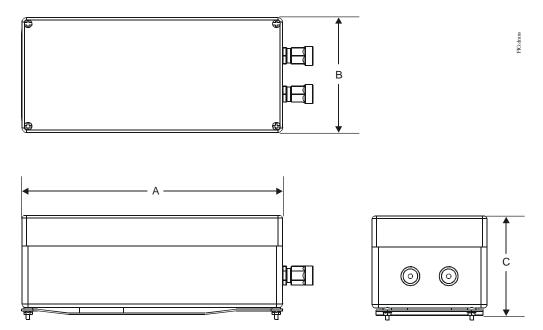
M9000-330 and M9000-340 Weather Shield Enclosure Dimensions, in. (mm) (See Table 4.)
